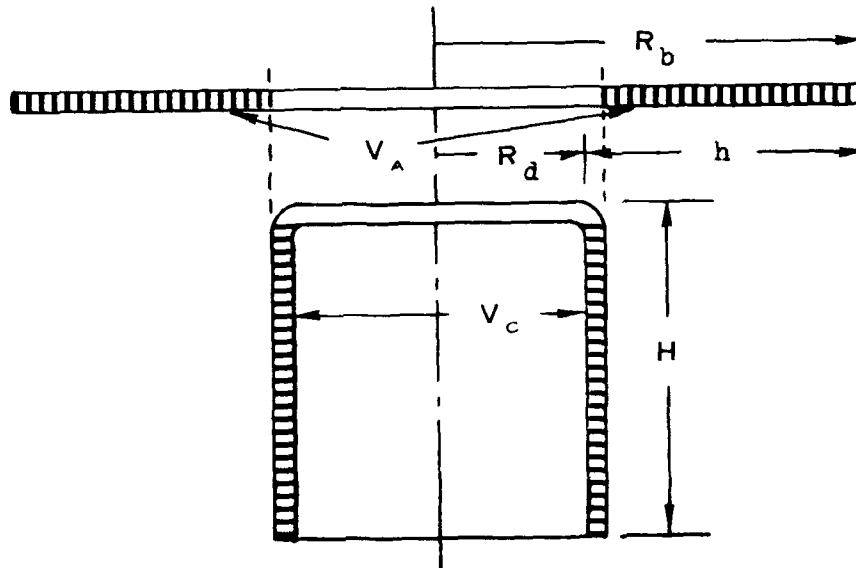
CROSS SECTION OF DEEP RECESSED PART
